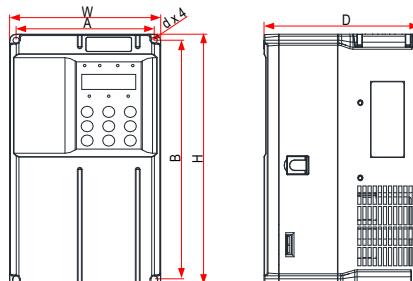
Outline dimensions and installation dimensions of 0.4–15 kW AC drive models
